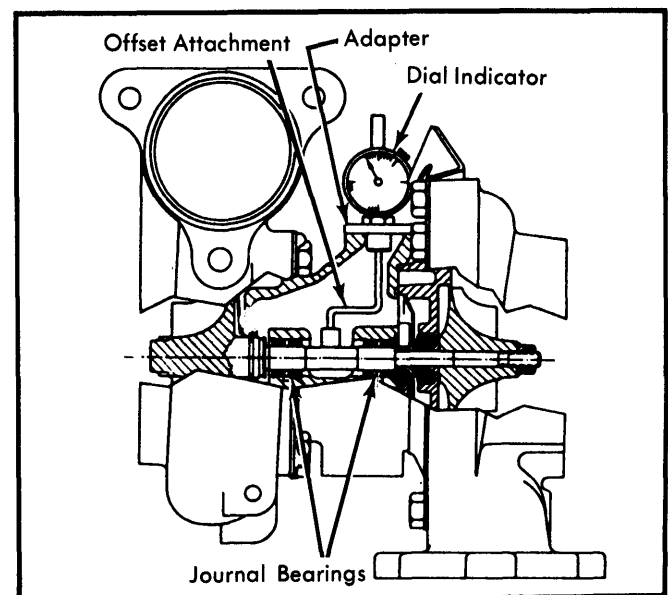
Dial Indicator Installation for Measuring Journal Bearing Radial Clearance
